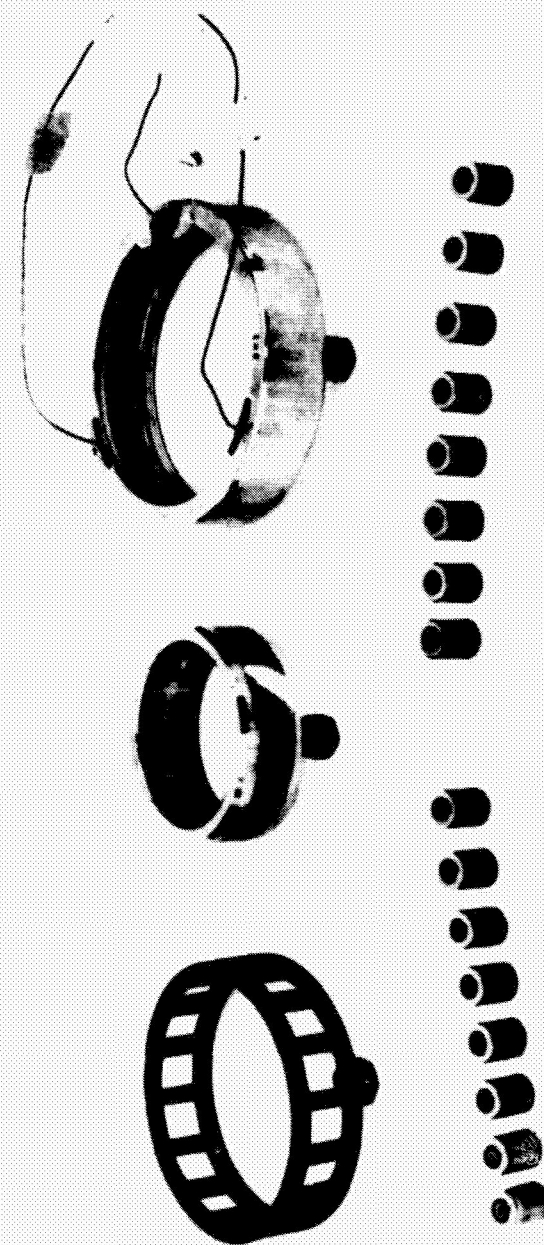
Posttest Appearance of Motor Roller-Bearing Components, Showing Roller End Wear from Reduced-Coolant-Flow Rate Experiments
